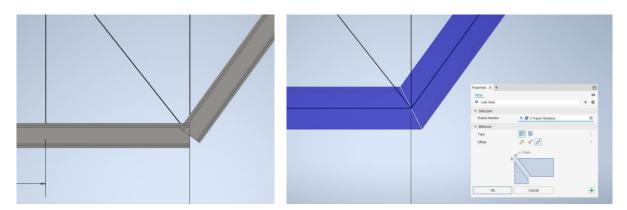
Frame generator – left image, two beams after insertion, right image – end of beams shaped to fit each other for welding
